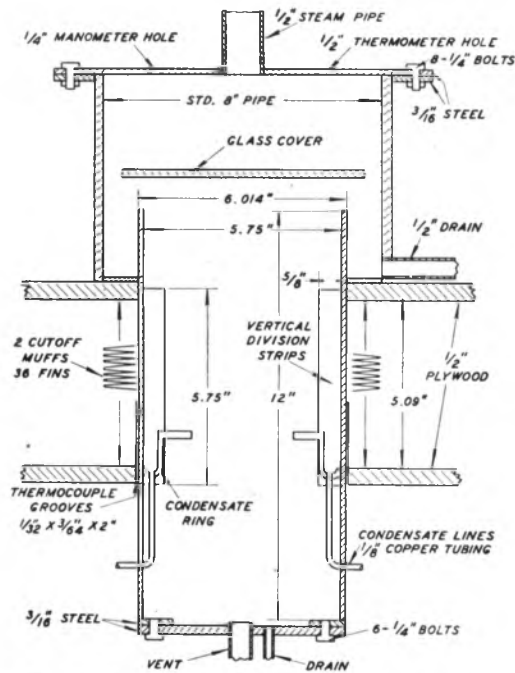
SECTIONAL ELEVATION OF TEST SECTION
